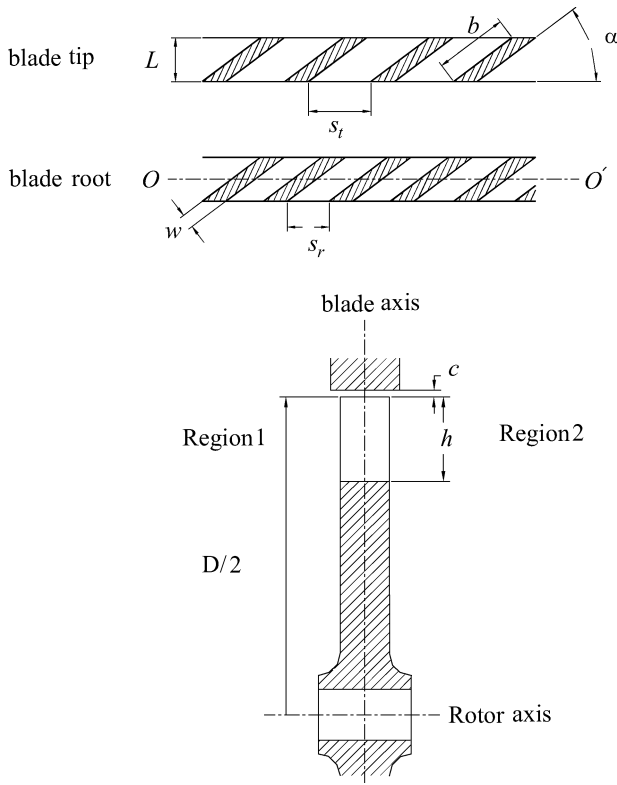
Top view of blades and cross-sectional view of a single rotor.
